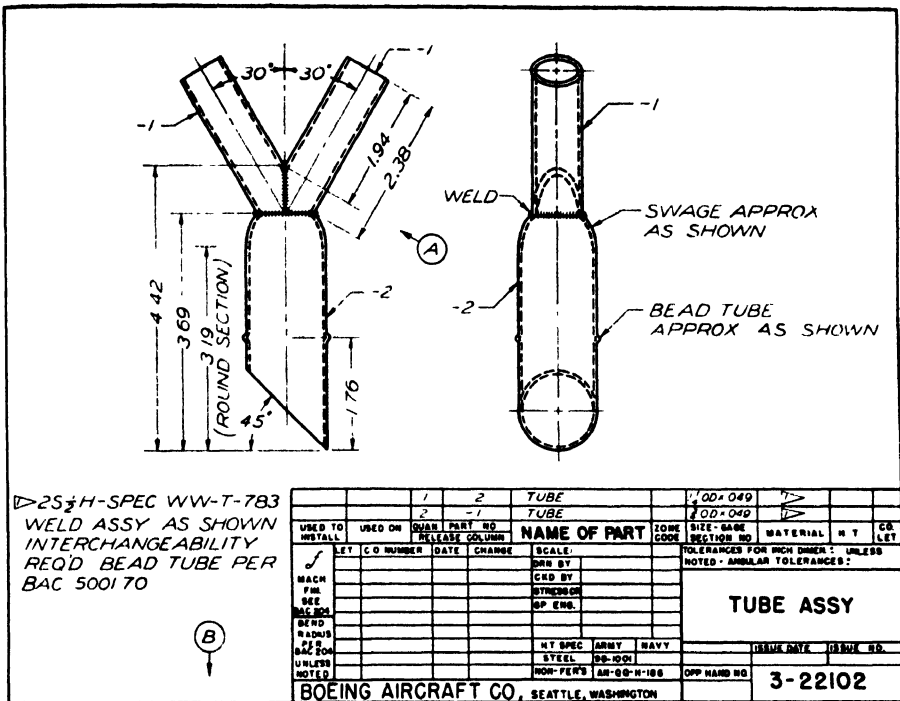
Tube assembly drawing. Prob. 416. (Boeing Aircraft Company.)
